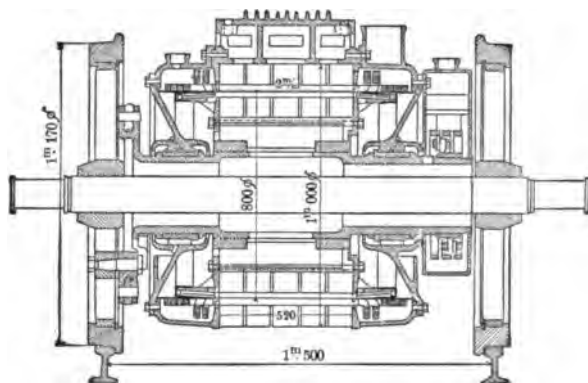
VALTELLINA GEARLESS MOTOR.
